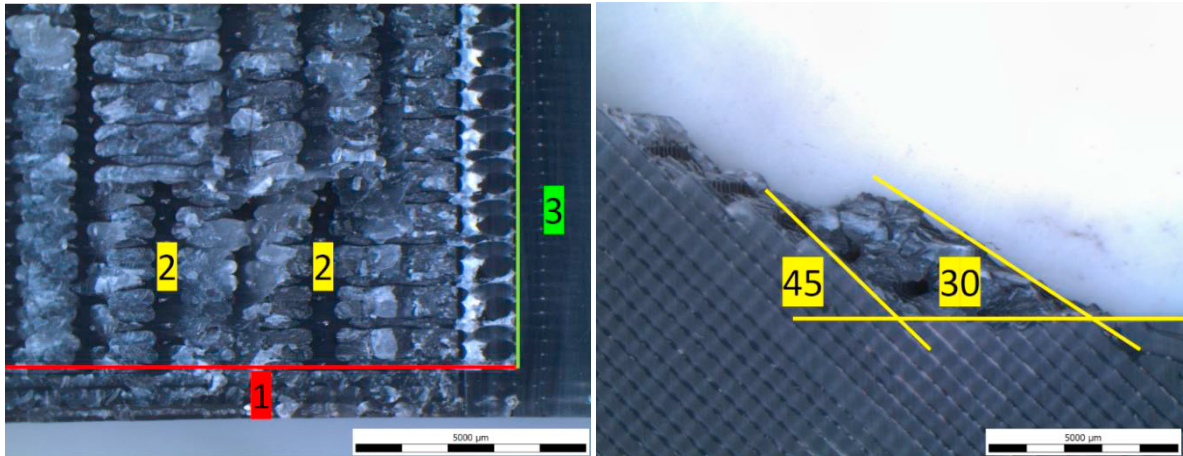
Fracture surface of 0.3 mm regular CT specimen: Top view (Left); Side view (Right).
